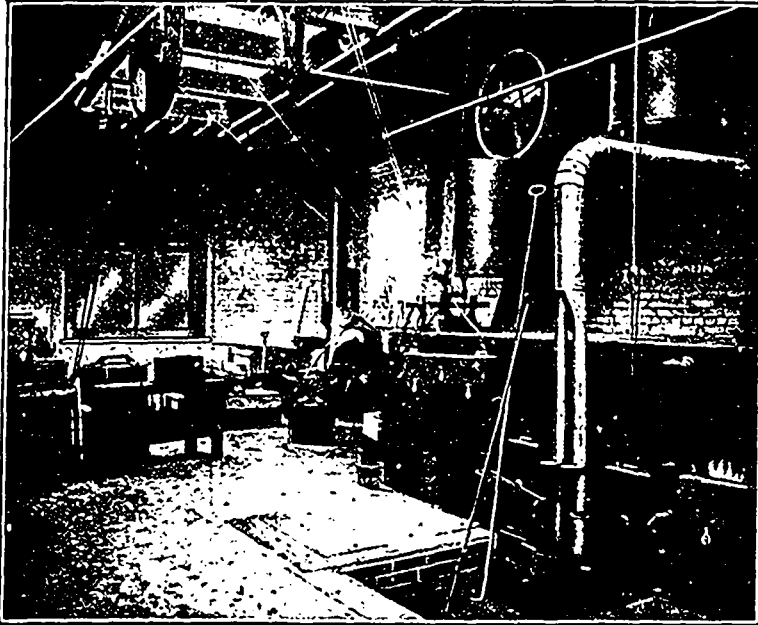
A Glimpse of the Furnaces Used to Temper Steel for Chapman Double Ball Bearings.
